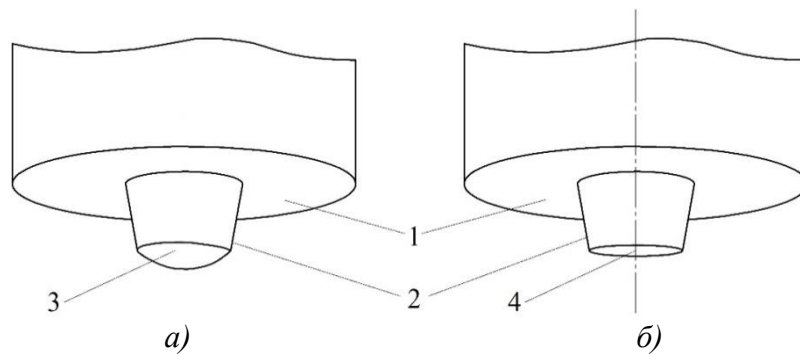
Types forms of the cylindrical pin of the tool end:
